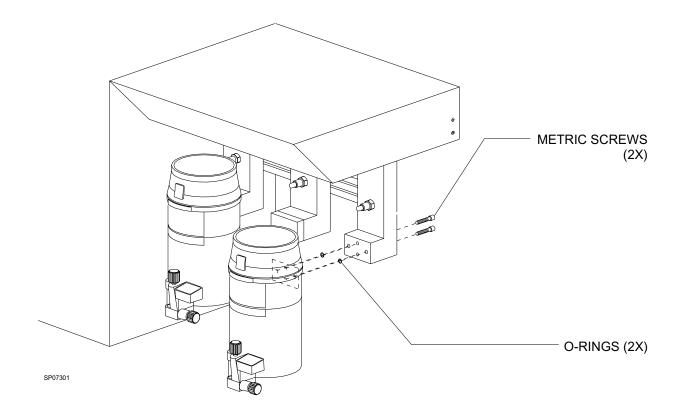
VAPORIZER MOUNTING ARRANGEMENT (FUNNEL FILL TYPE ILLUSTRATED)
